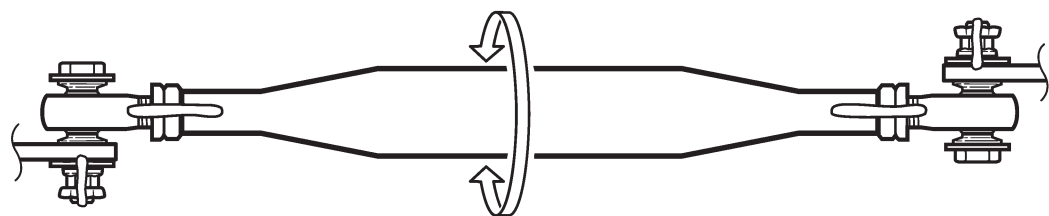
ROD END AND SPHERICAL BEARING PLAY LIMITS AND TORQUE STRIPE APPLICATION
